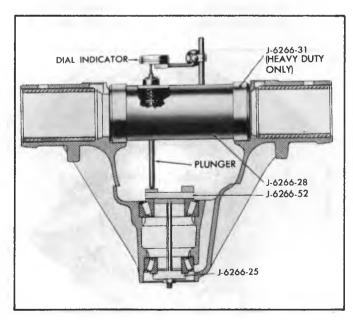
B-Installed View of Pinion Depth Gauge (Truck Axle)
